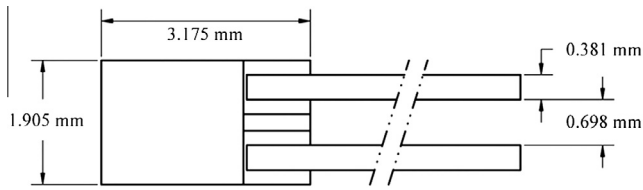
Top view schematic and dimensions of the model DT-670-SD package.
